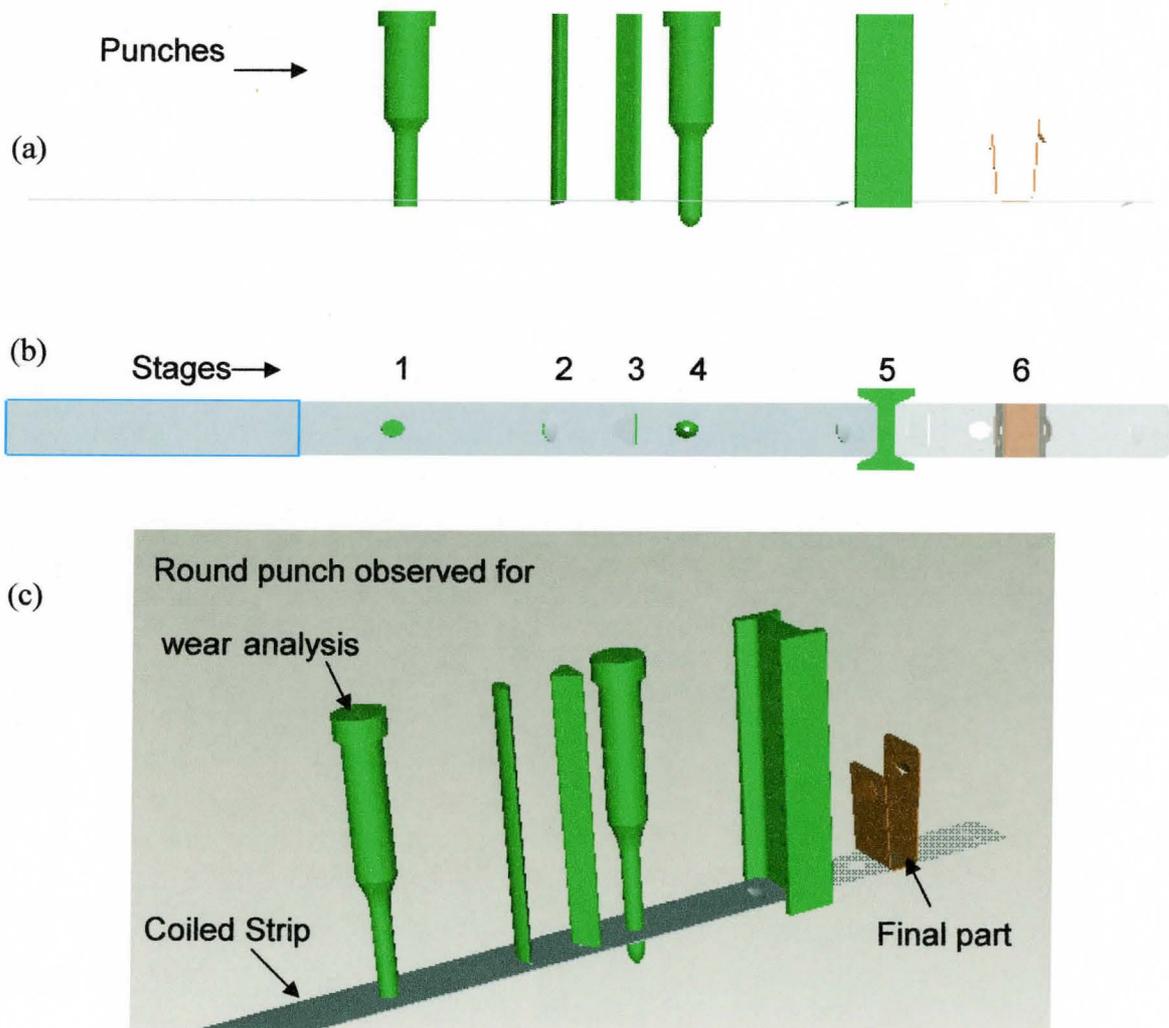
Strip layout (a) Front view (b) Plan (c) Isometric view.
